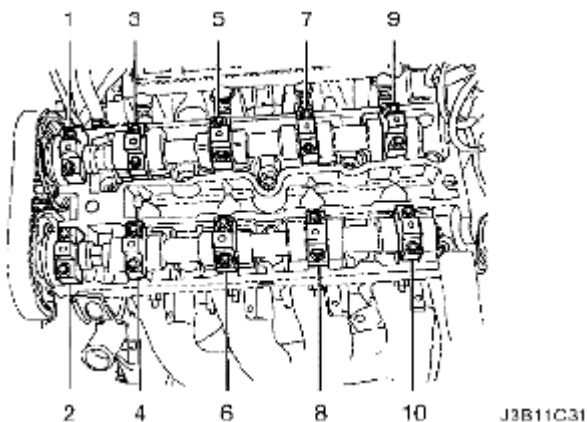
Identifying Camshaft Bearing Cap Bolts Installation Sequence
